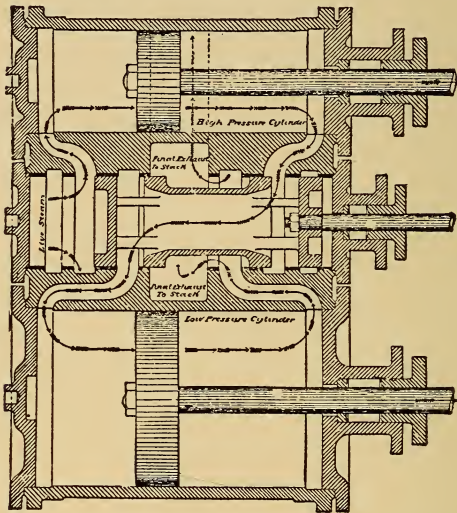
SECTION OF CYLINDERS AND VALVE CHEST—VAUCLAIN COMPOUND ENGINE.
